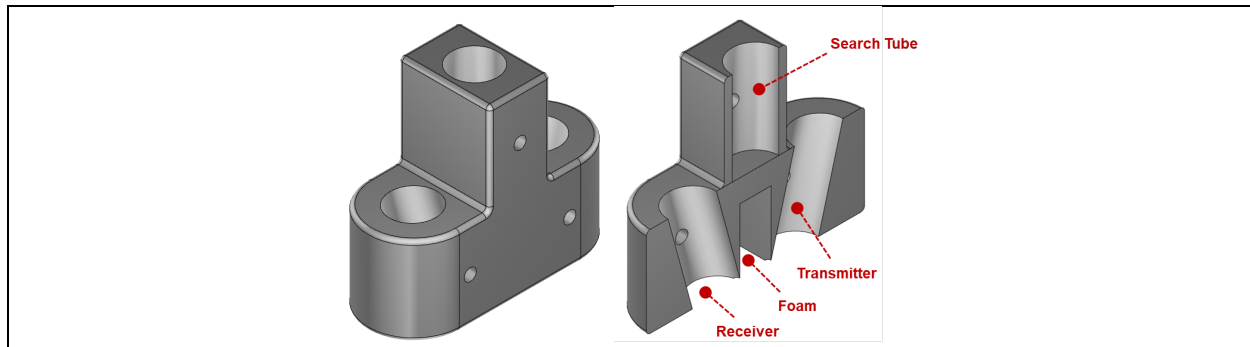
Model of a 3D printed fixture for guided wave measurements.
